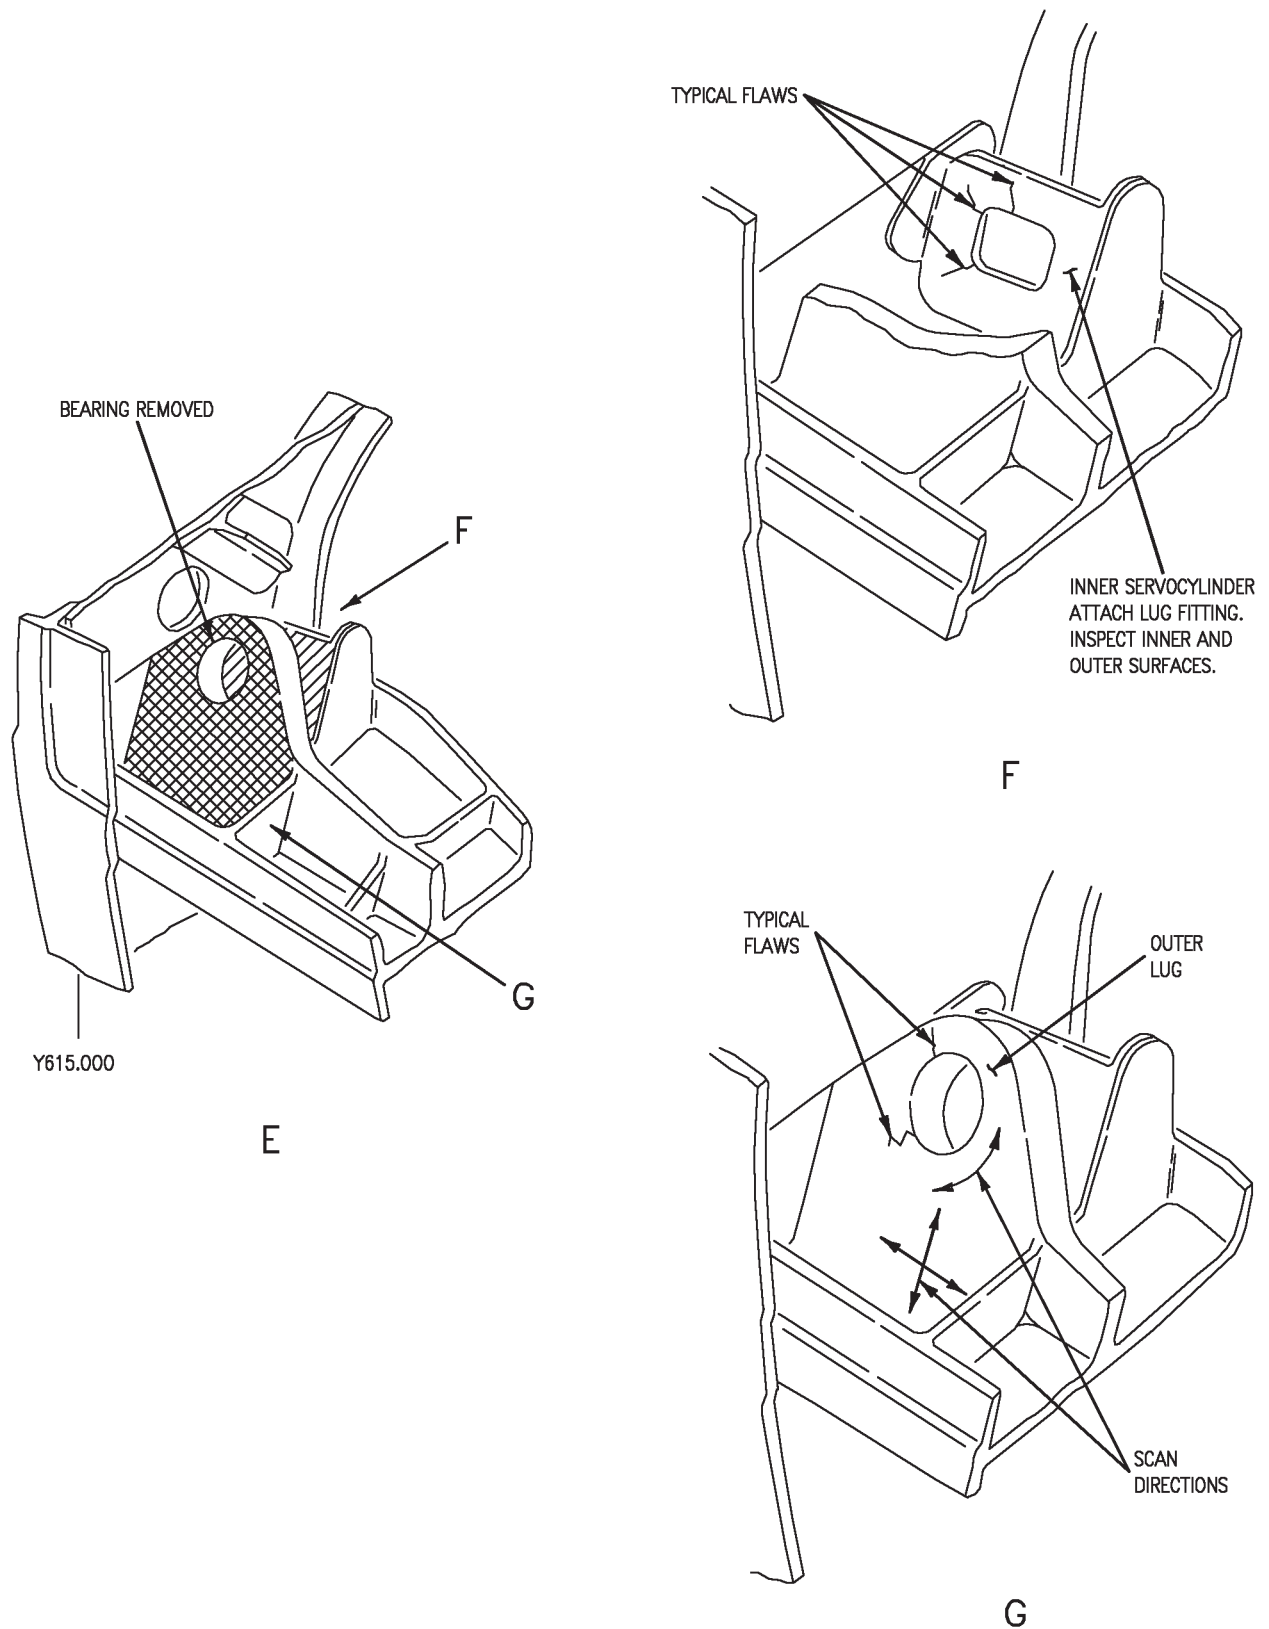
Horizontal Stabilator Structural Support Inspection Areas, Typical Flaws, and Scan Directions (Sheet 5)
